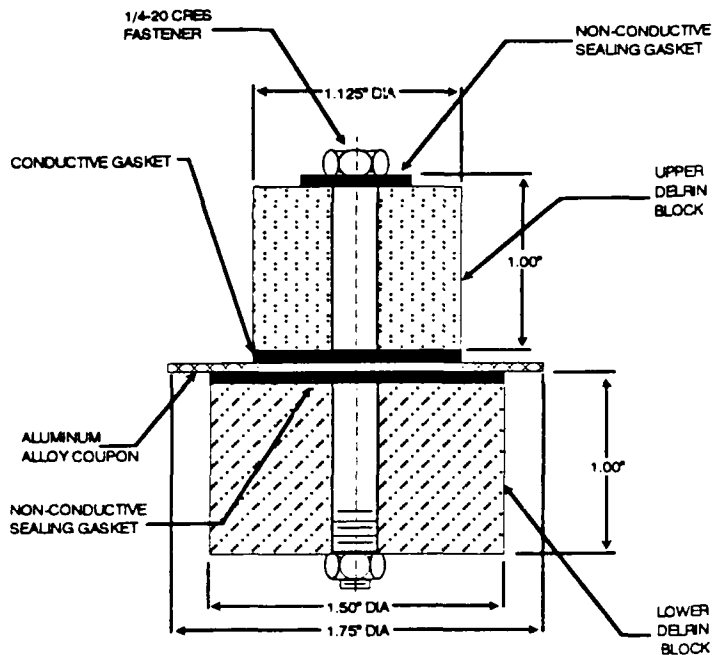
Test Fixture For Holding Aluminum Coupon and Conductive Elastomer in Contact During Environmental Exposure.
